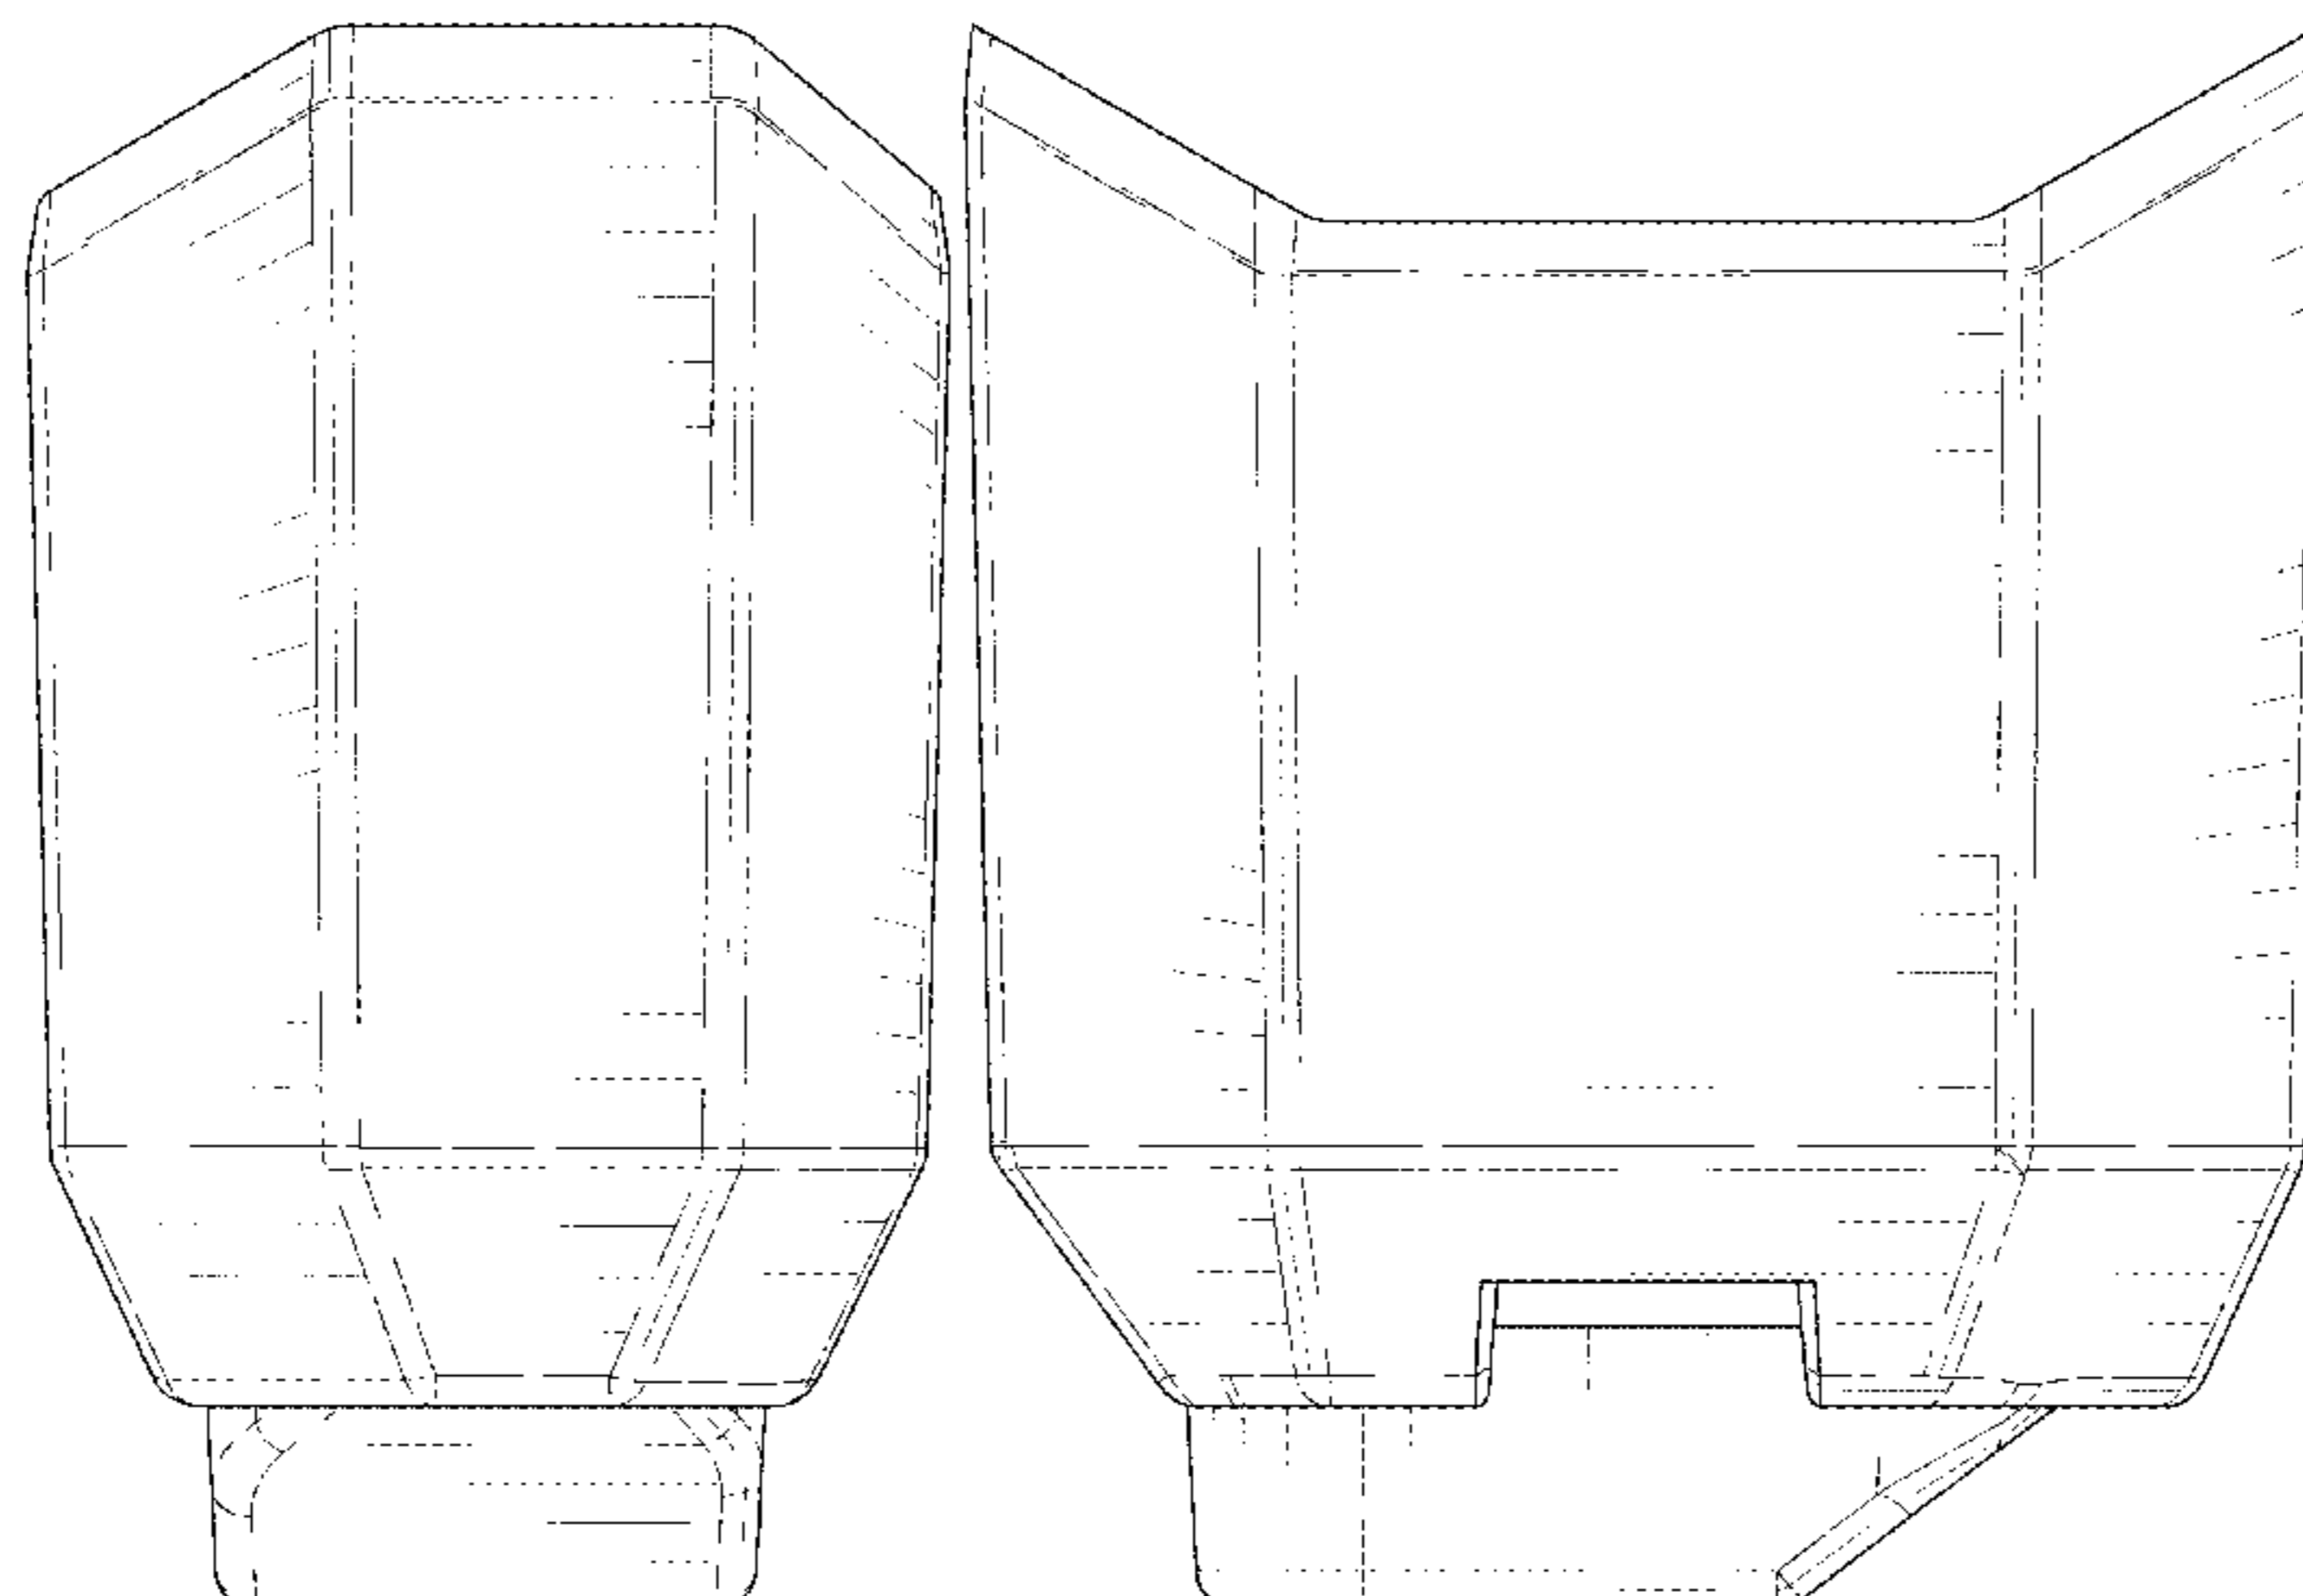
is a front, right side perspective view of the extruder cap shown in an environment.
